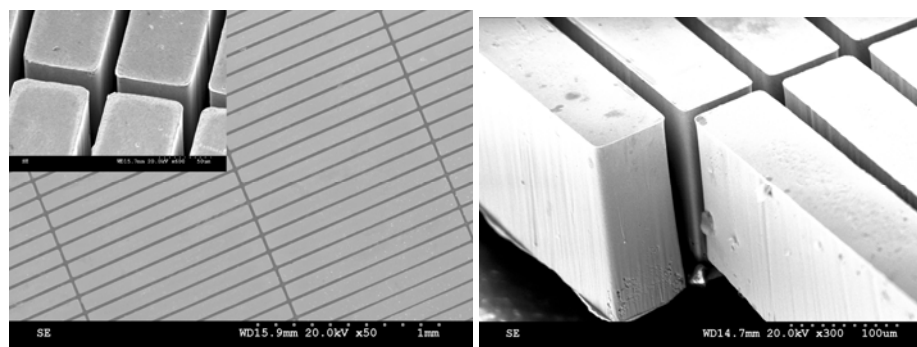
(a) Top view and (b) Cross section of copper mold after SU-8 removal (defined using Mask D)
